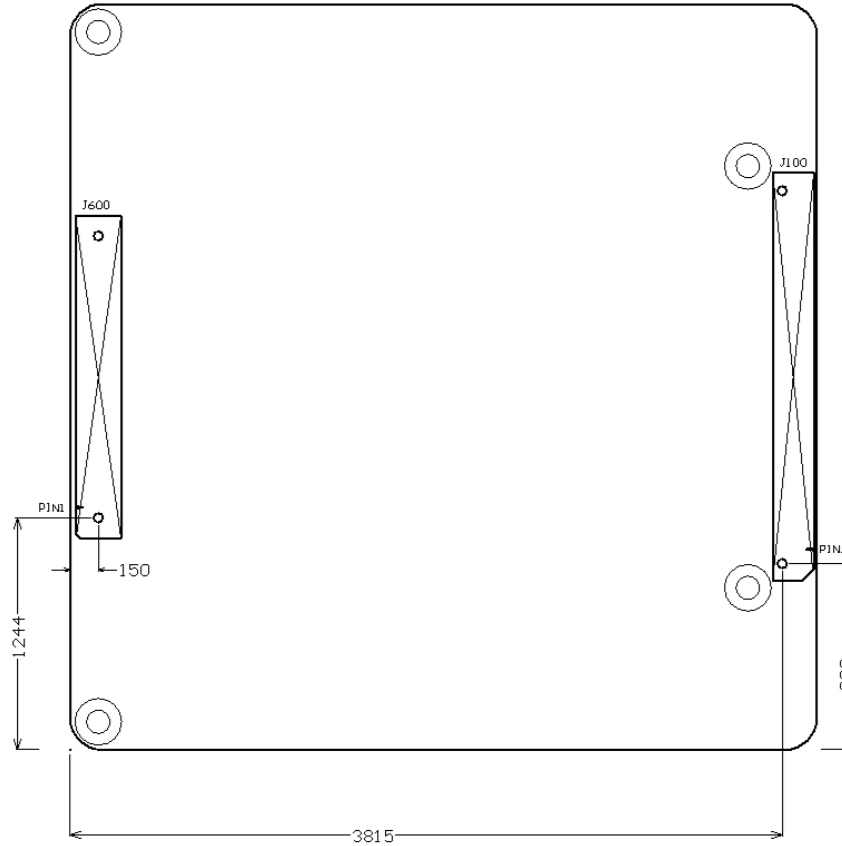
MitySOM-A10S-DSC Mechanical Outline, Bottom Side, View from Top
